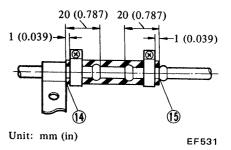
Fuel pipe A to fuel pipe B or C rubber hose
